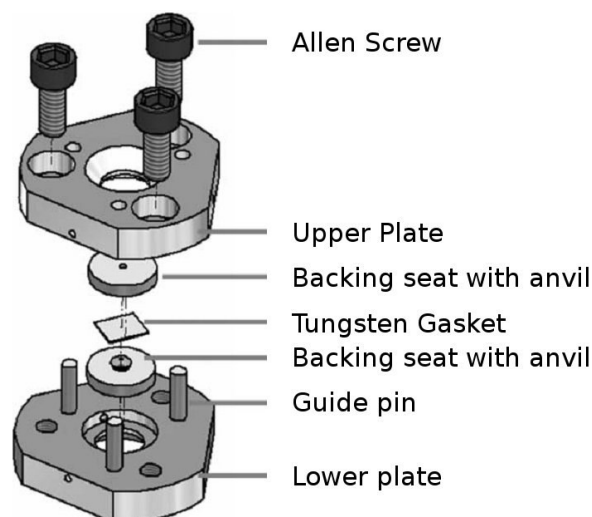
An exploded view of the Merrill-Bassett diamond anvil cell¹⁵ showing the steel plates comprising the cell body, backing disks with anvils and gasket. Pressure is applied using Allen screws.
